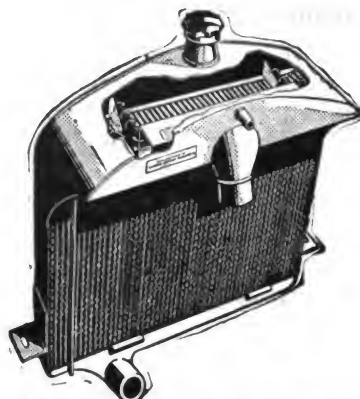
Sketch of Curran Radiator showing thermostatic control device
